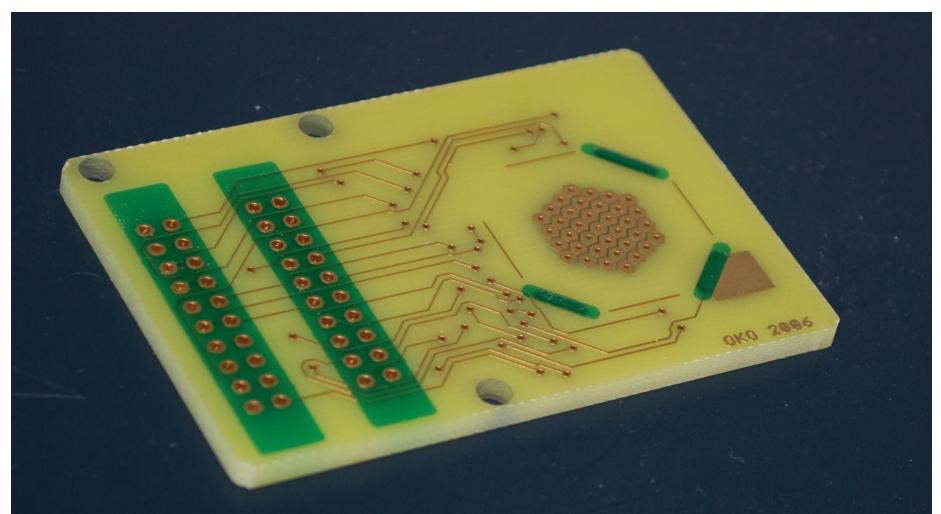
A PCB on which a flexible mirror can be attached. This PCB supports 37 actuators.
